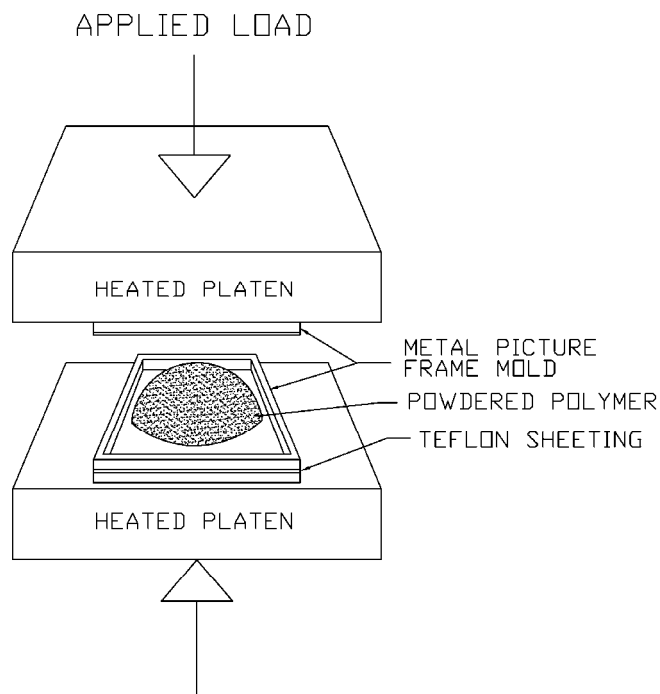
Schematic of resin sheet formation using a picture frame mold
